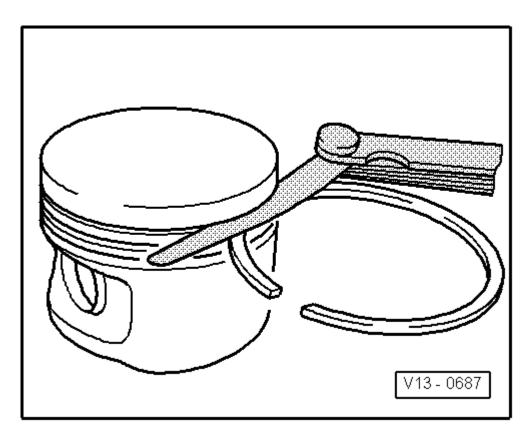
Checking Piston Ring Gap Courtesy of AUDI OF AMERICA, LLC
